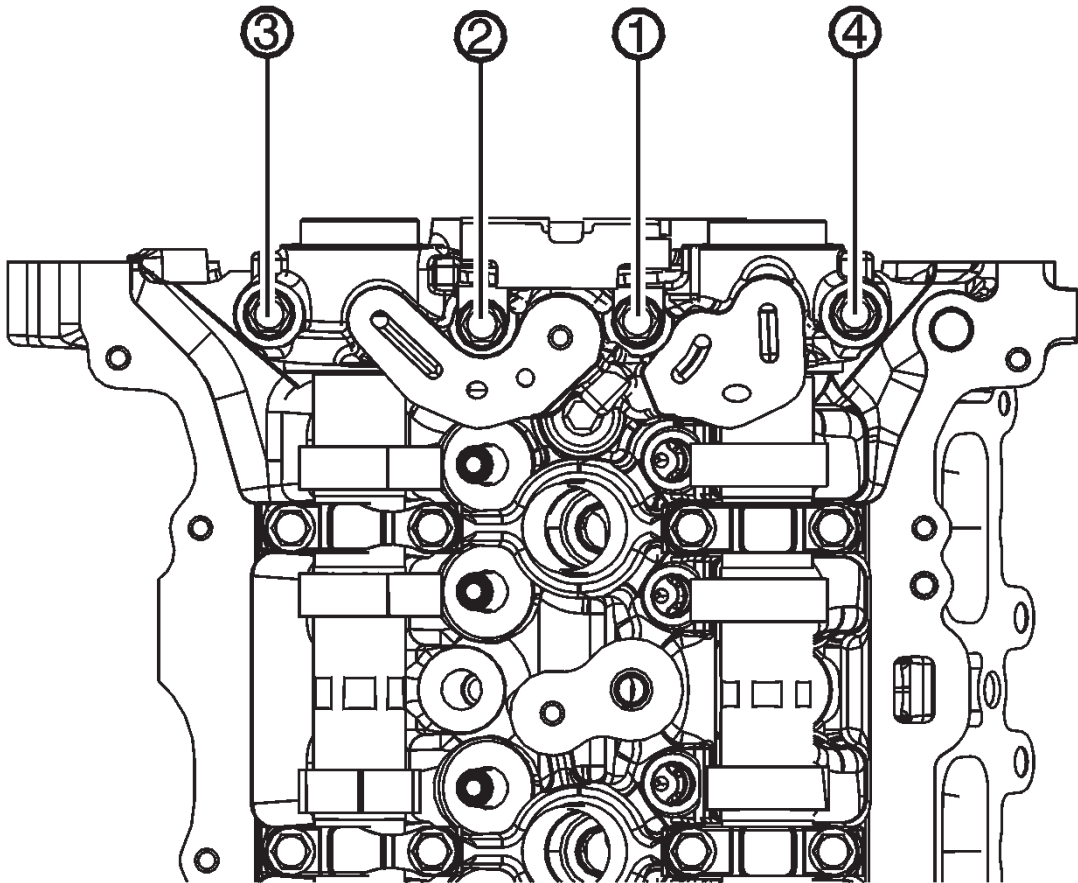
Front Camshaft Cap Bolt Tightening Sequence
